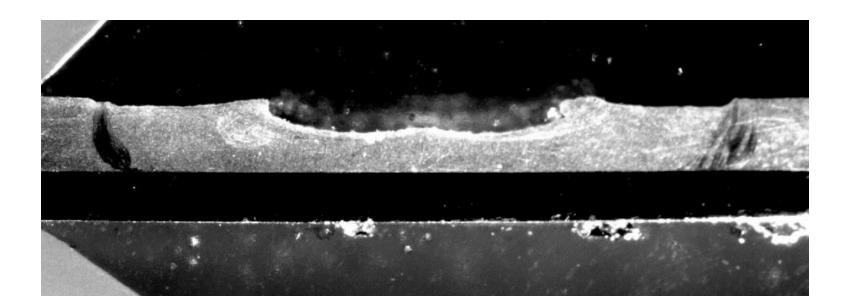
Macro of the cross section of a weld made using the sleeve plunge weld sequence
